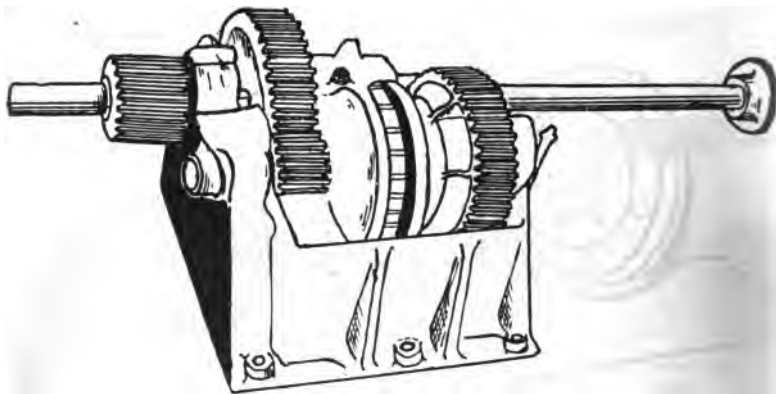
,282.—Niles crane construction: Mechanical load brake. It is of the double disc type with hard bronze wearing surfaces. It is automatic in action and self-contained, all thrusts being taken up within itself. The brake will not permit the load to run down unless the motor is revolved by power in the lowering direction.
